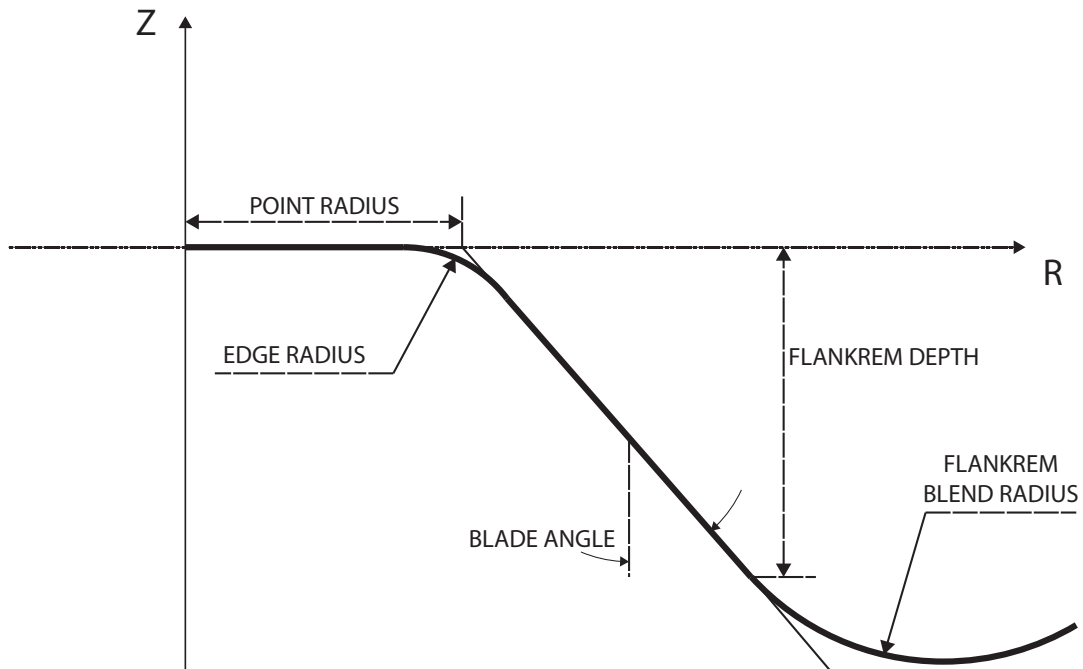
Cutter description for Straight Blade with Blended Flankrem (New Cutter)
